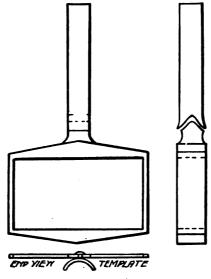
METHOD OF WELDING THE STEM.
